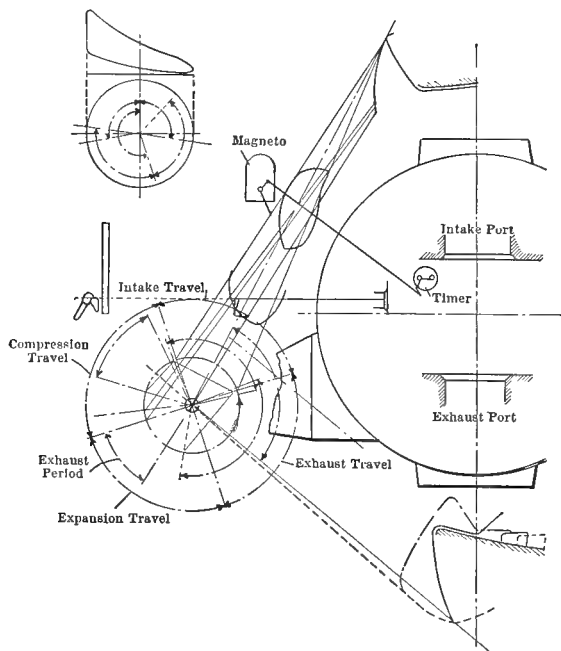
Diagram of Valve Gear Operation from Single Eccentric (Reichenbach).
